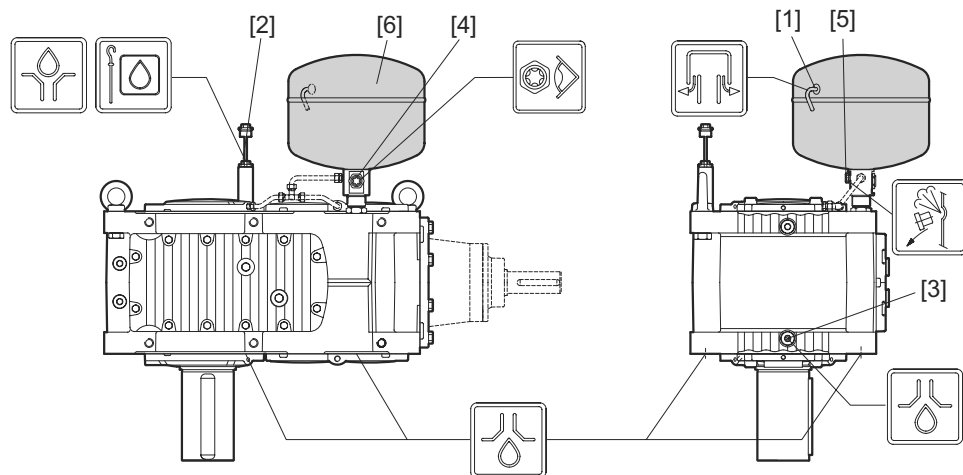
MC.PV../MC.RV.. industrial gear units with steel oil expansion tank
